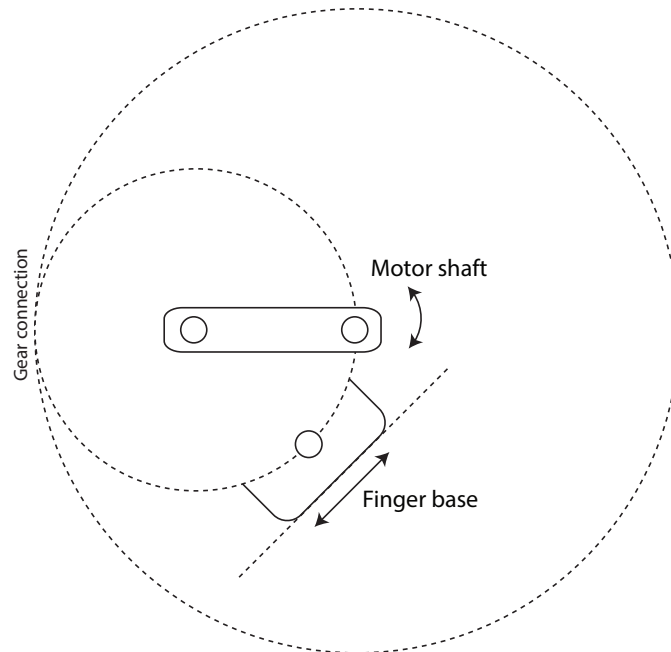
Sketch of the half radius gear system. The dashed lines represent the teathed surfaces. It also shows the arm which translates the motion of the motor shaft into the movement of the inner gear.
